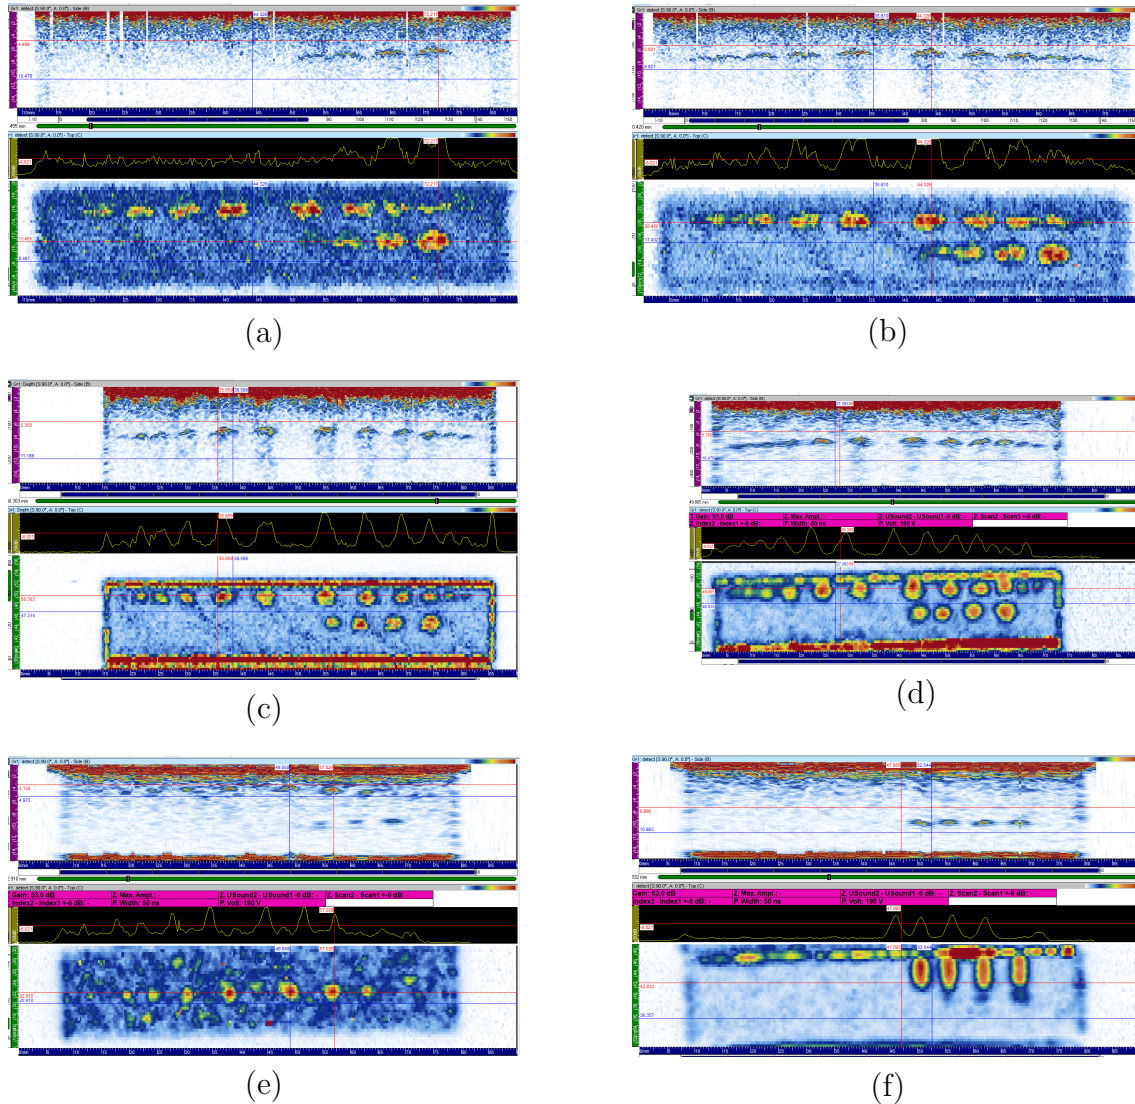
Ultrasonic response from Block 3, scanned with various probes and surfaces: (a) 1.5" probe, machined surface (b) 1.5" probe, unmachined surface (c) 2.5" probe, unmachined surface without channel, (d) 2.5" probe, machined surface without channel, (e) 3.25" probe, unmachined surface without channel and (f) 3.25" probe, machined surface without channel. The B-scan is shown in the top window and the C-scan in the bottom window for all cases.
